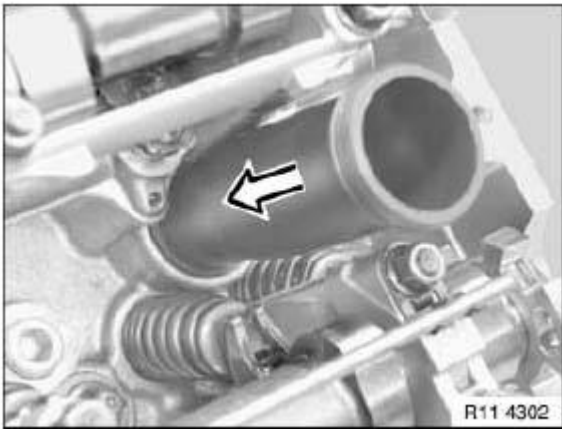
Installing Spark Plug Domes In Cylinder Head
